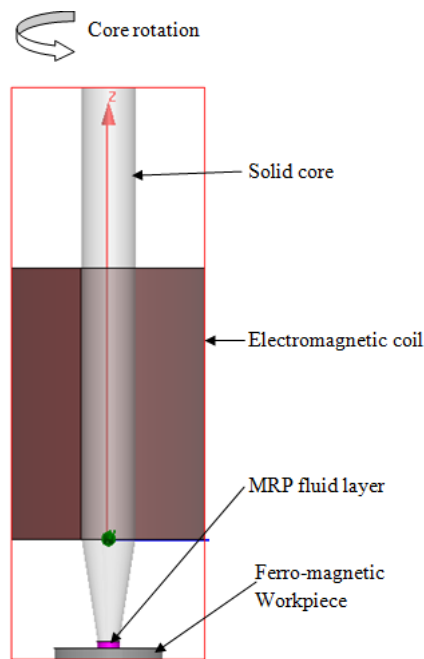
Electromagnet model of ball end type magnetorheological finishing solid core tool
